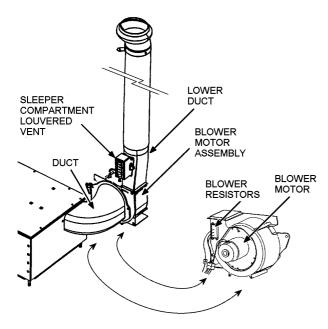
Blower Motor Assembly (Sleeper Compartment)
